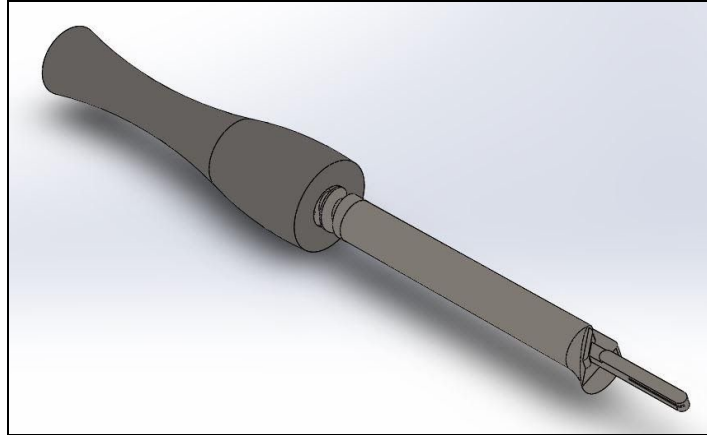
Screw model with blade holder attachment sketch in SolidWorks.
